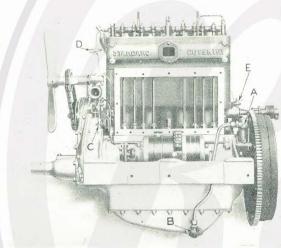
NEARSIDE OF THE 14 H.P. "STANDARD" ENGINE, WITH THE VALVE COVER AND THAT OF THE PUSHROD CHAMBER
